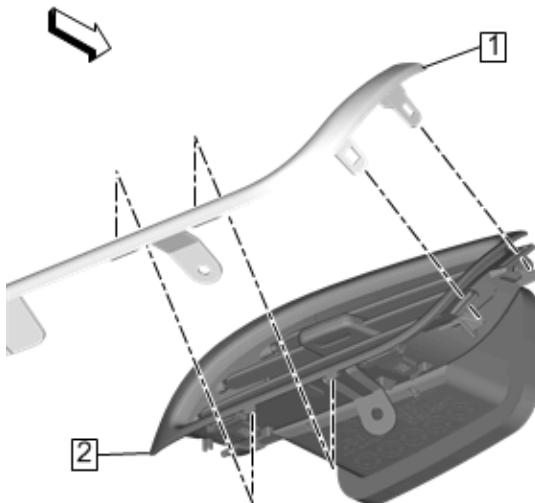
Instrument Panel Outer Air Outlet And Trim Plate Applique
